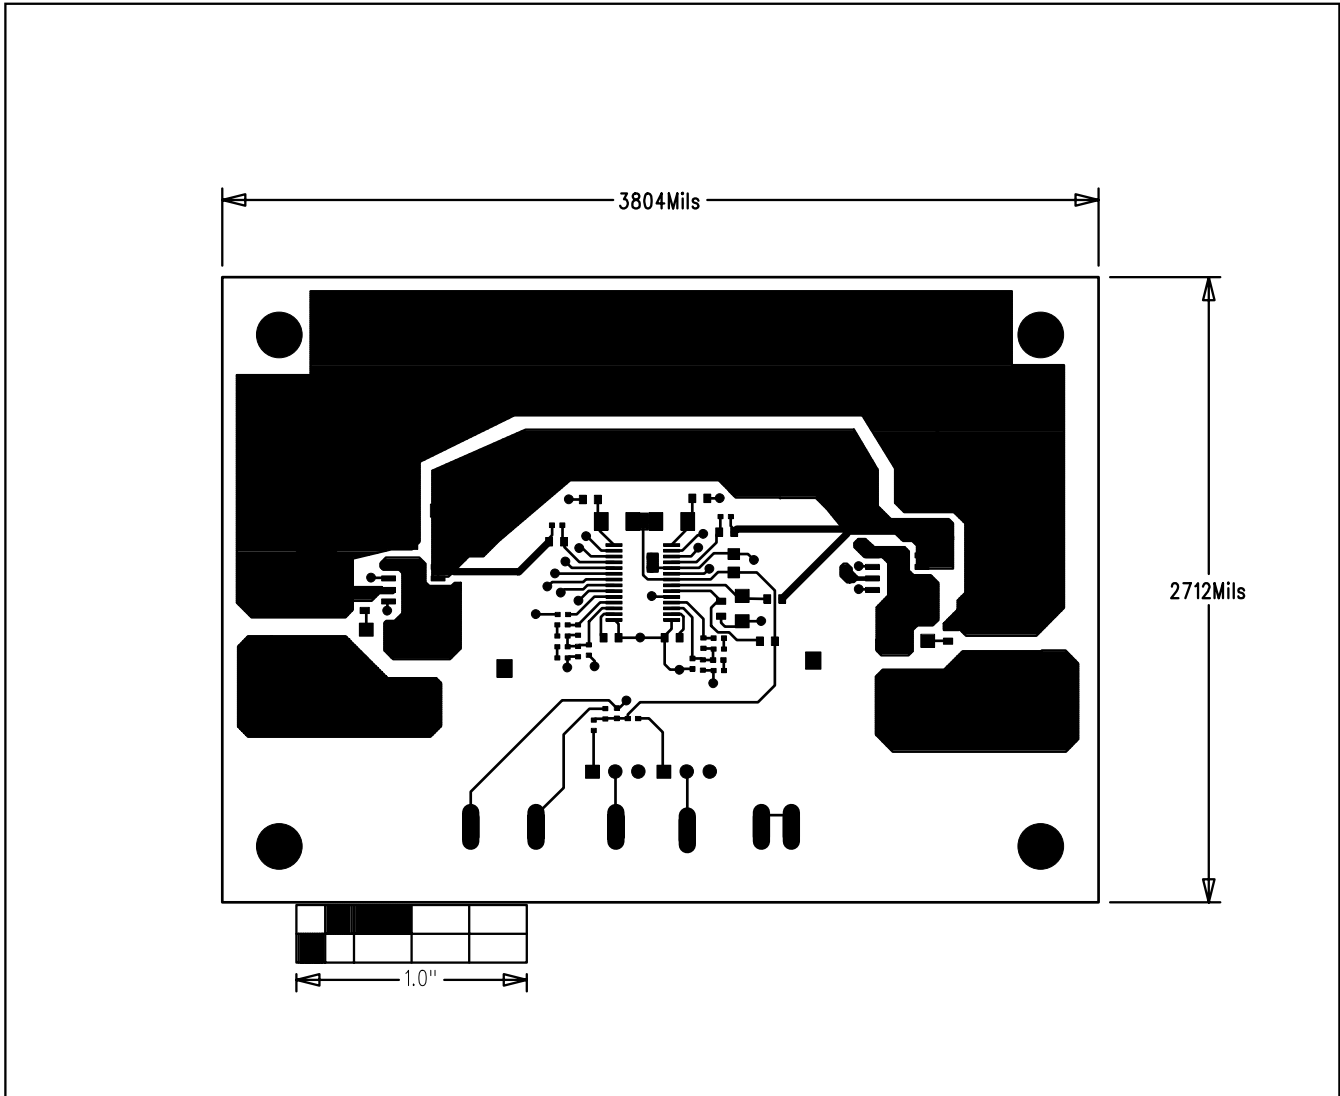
MAX8538 EV Kit PC Board Layout—Component Side
